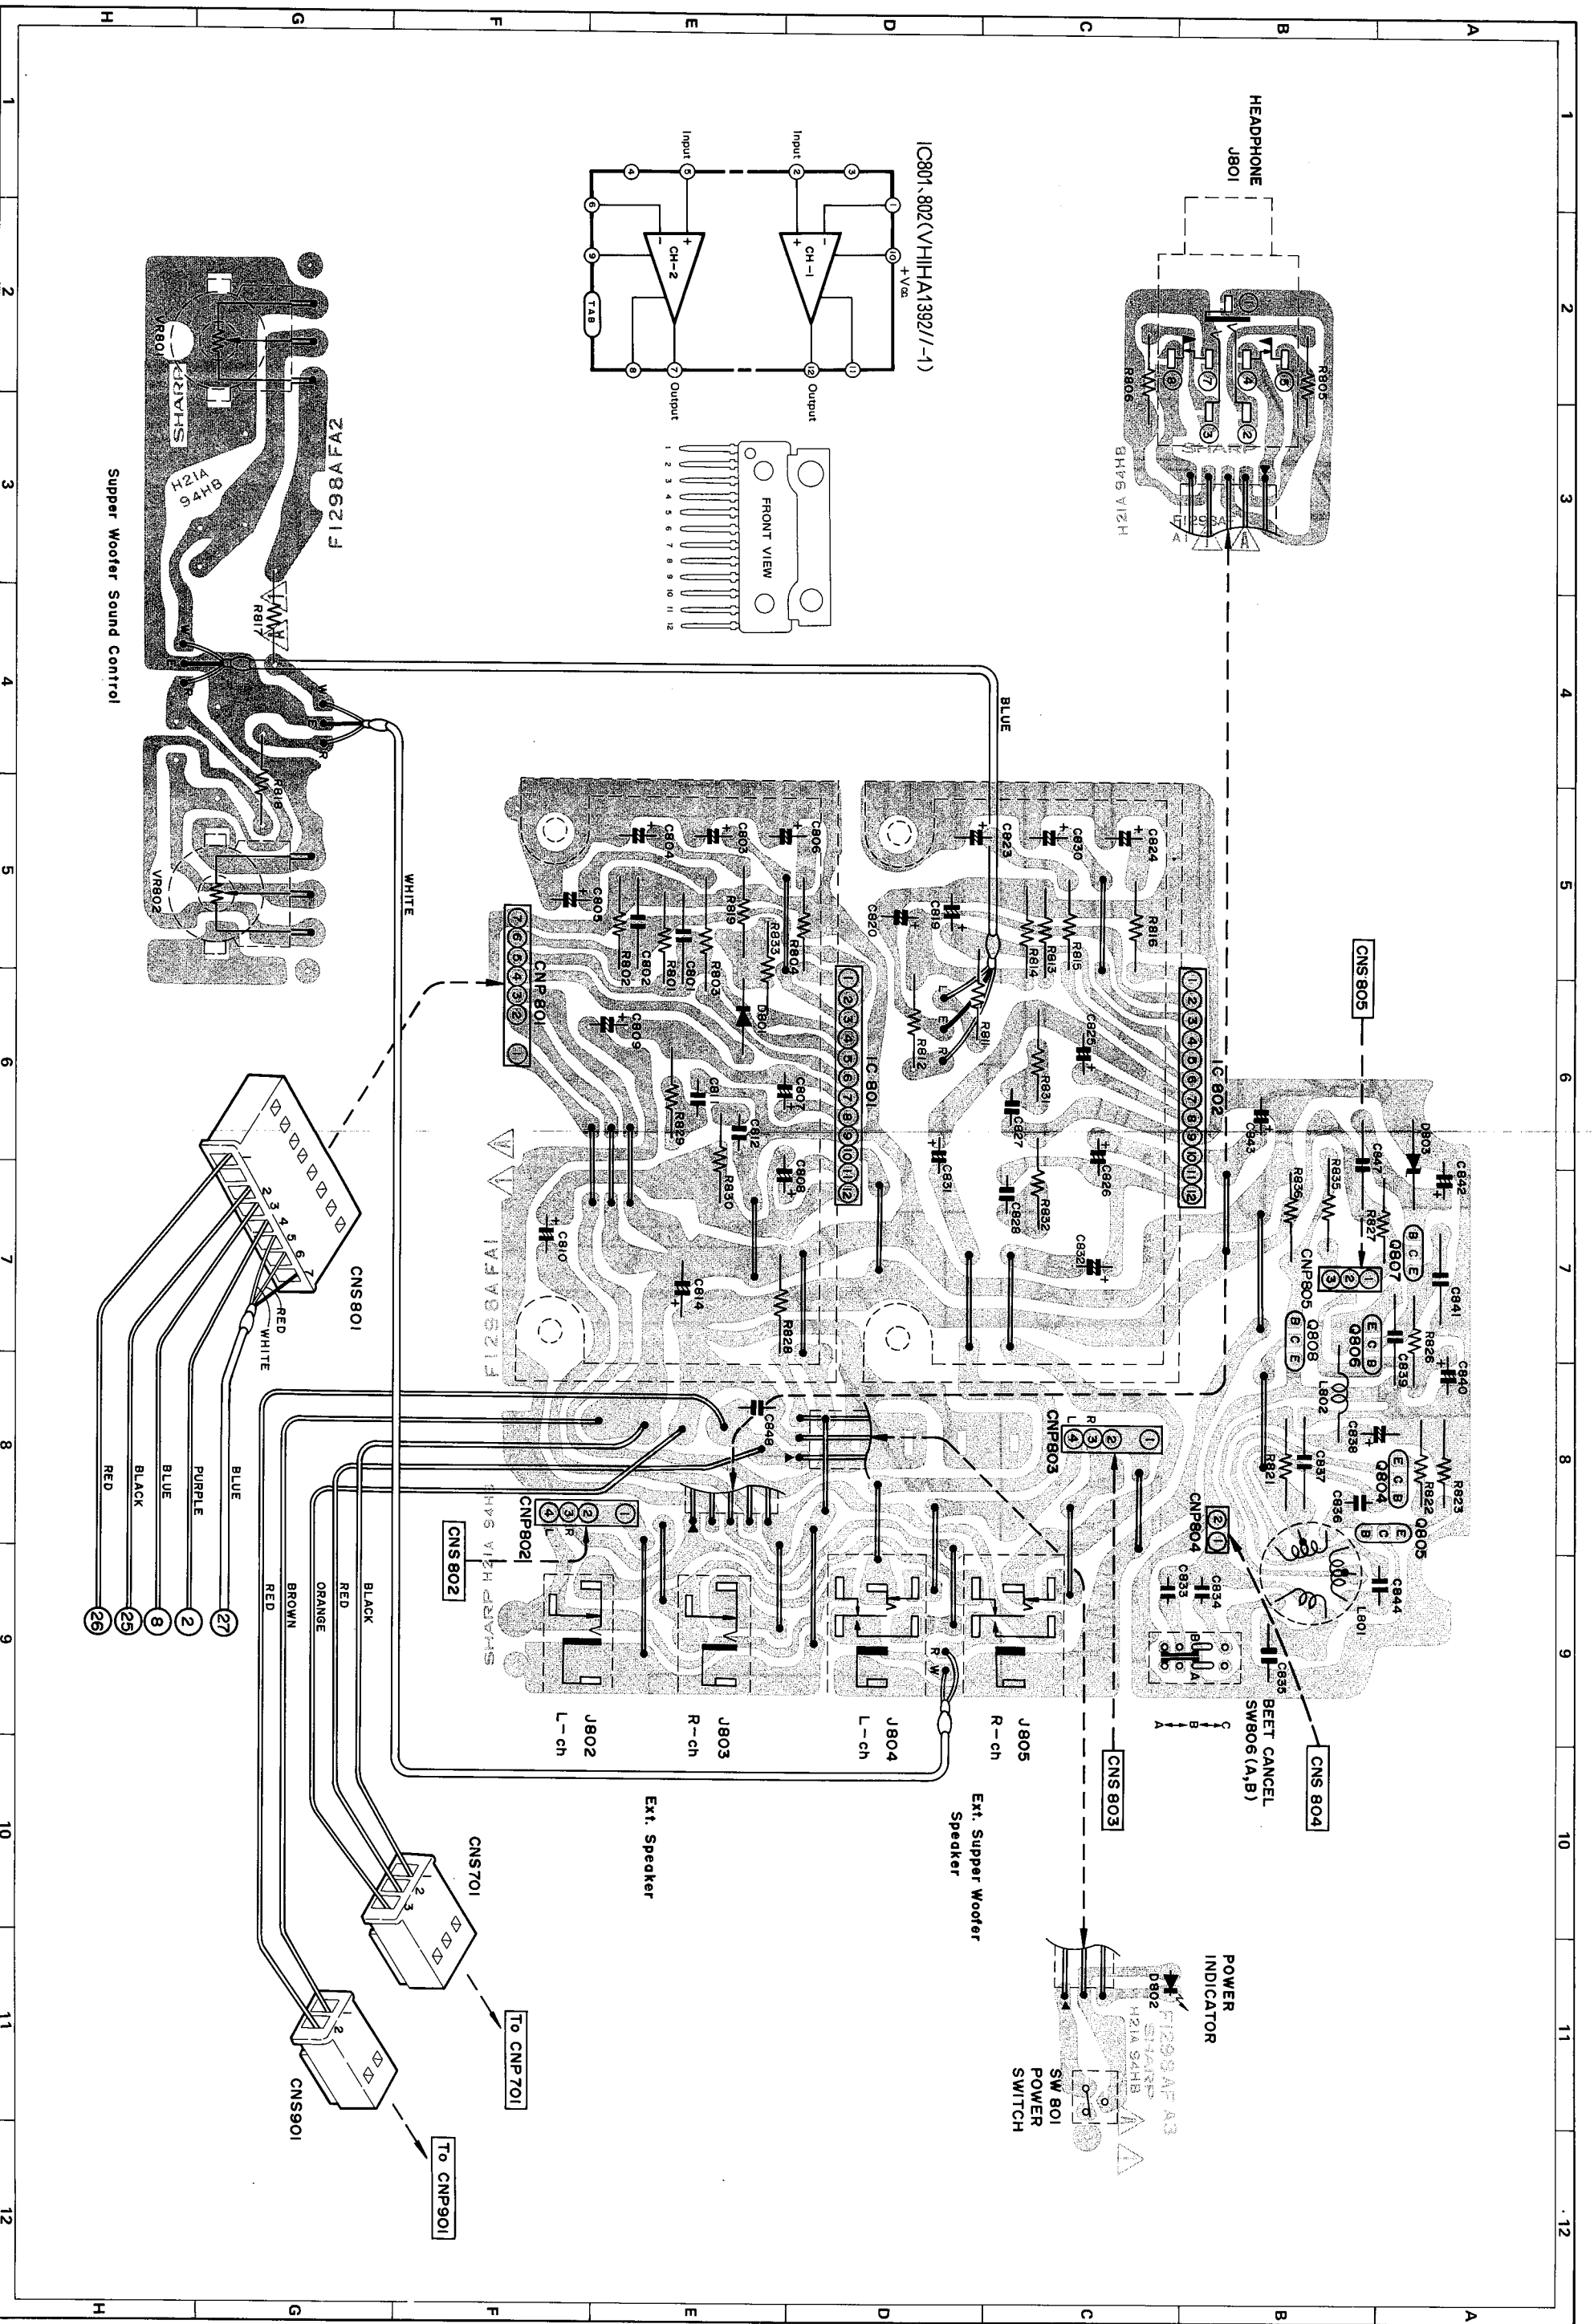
WIRING SIDE OF P.W. BOARD (6/6)
